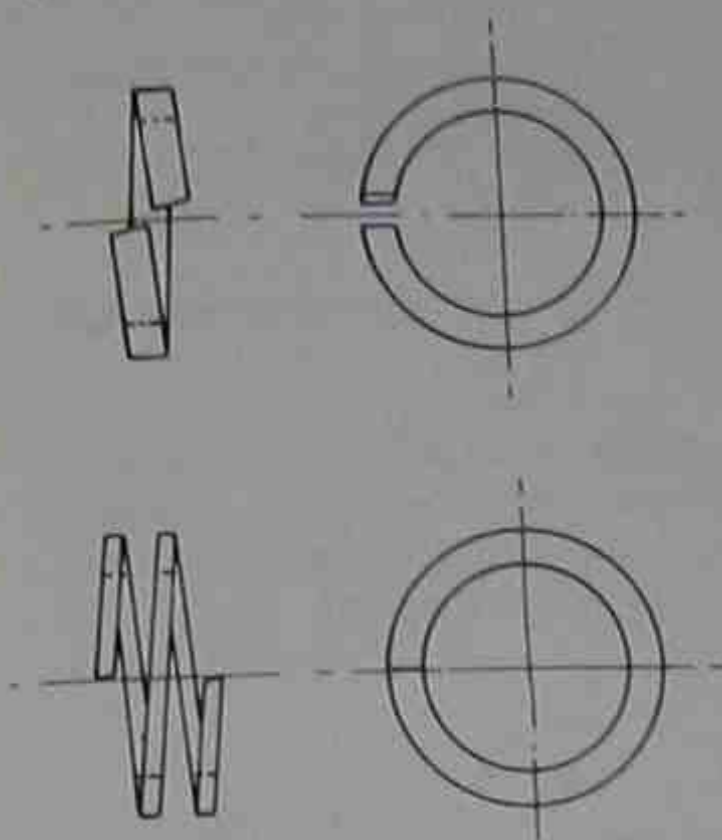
Helical spring lock washer and two-coil spring lock washer
